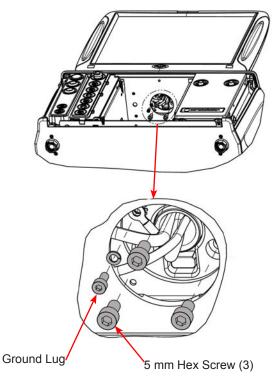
Hex Screws Securing Display Arm Assembly to Table Top Chassis (View from inside fluidics module compartment)
